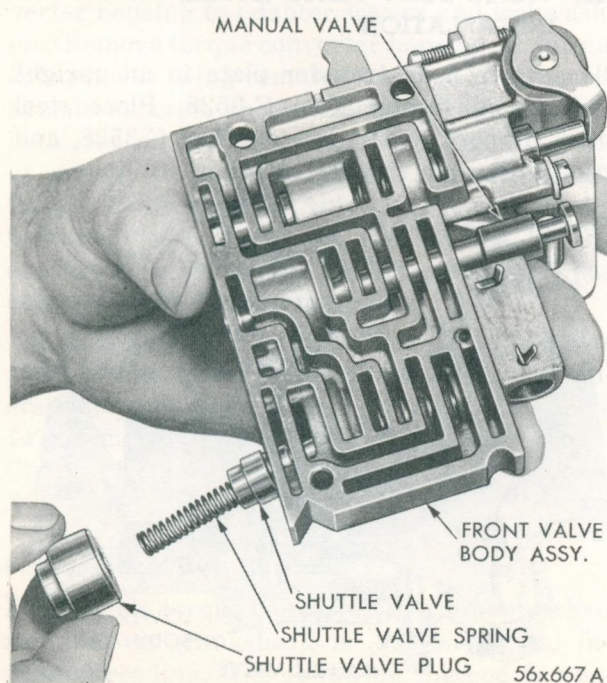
Removal and Installation of Shuttle Valve, Plug, Spring and Valve
